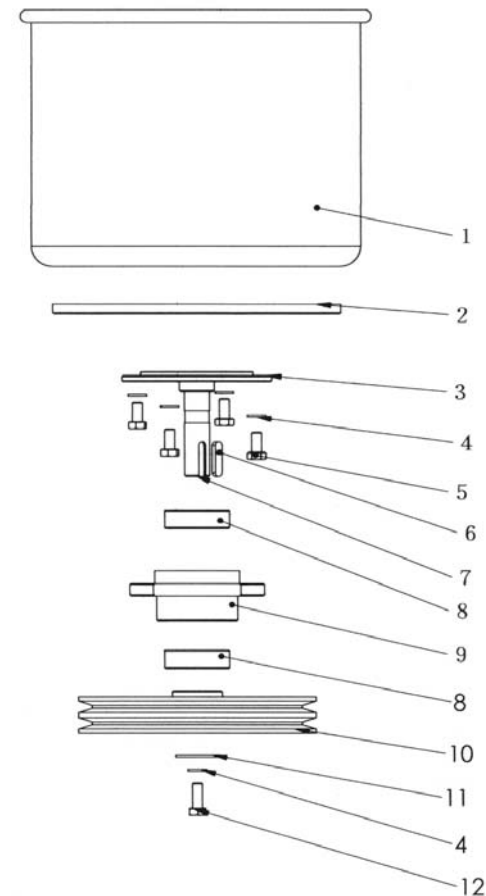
SPIRAL HOOK AXLE FULL SETS
